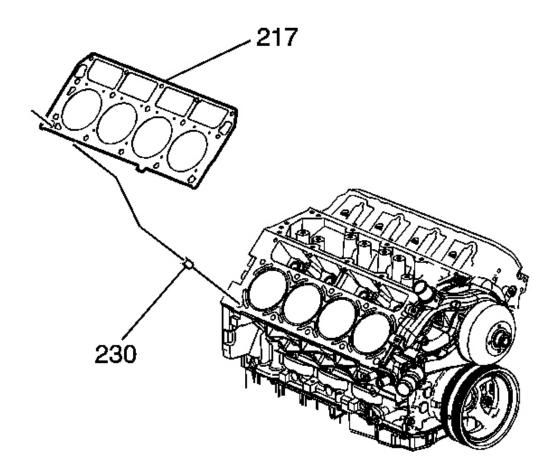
Cylinder Head Courtesy of GENERAL MOTORS CORP.
